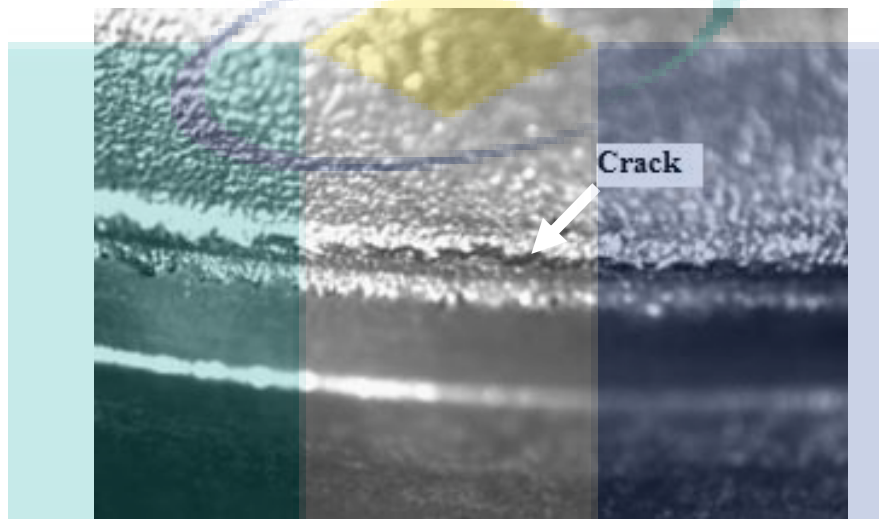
Front view of the crack found in cylinder liner engine diesel.
